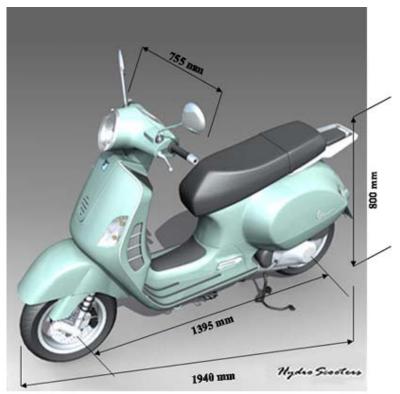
CAD model of Vespa GT200 showing main dimensions
